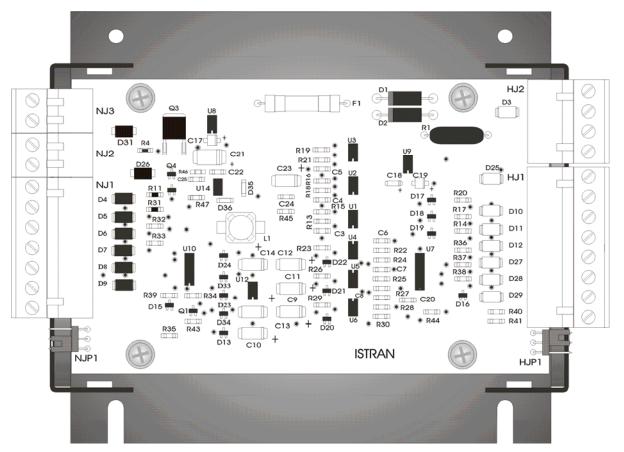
IStran PCB Mounted on Base Plate (Cover removed)
